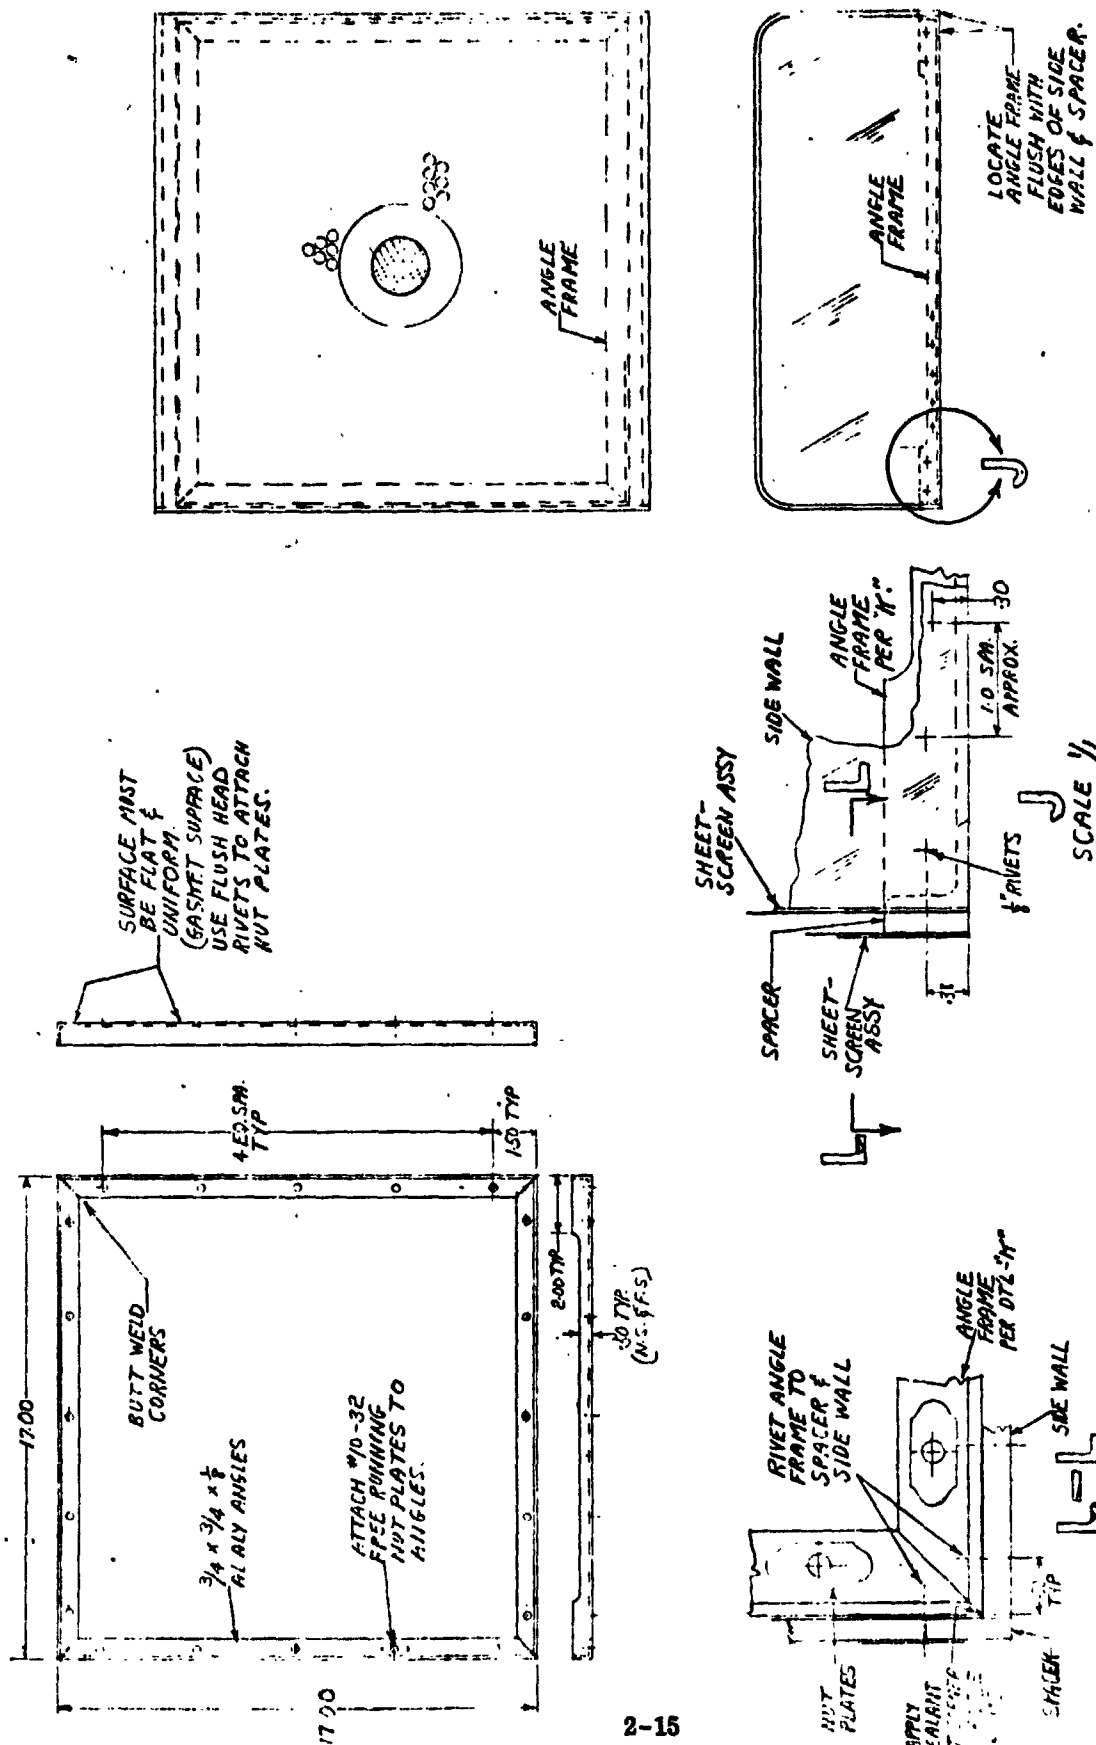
Inner Basket Assembly/Refilling Test Apparatus (Sheet 5 of 5)
